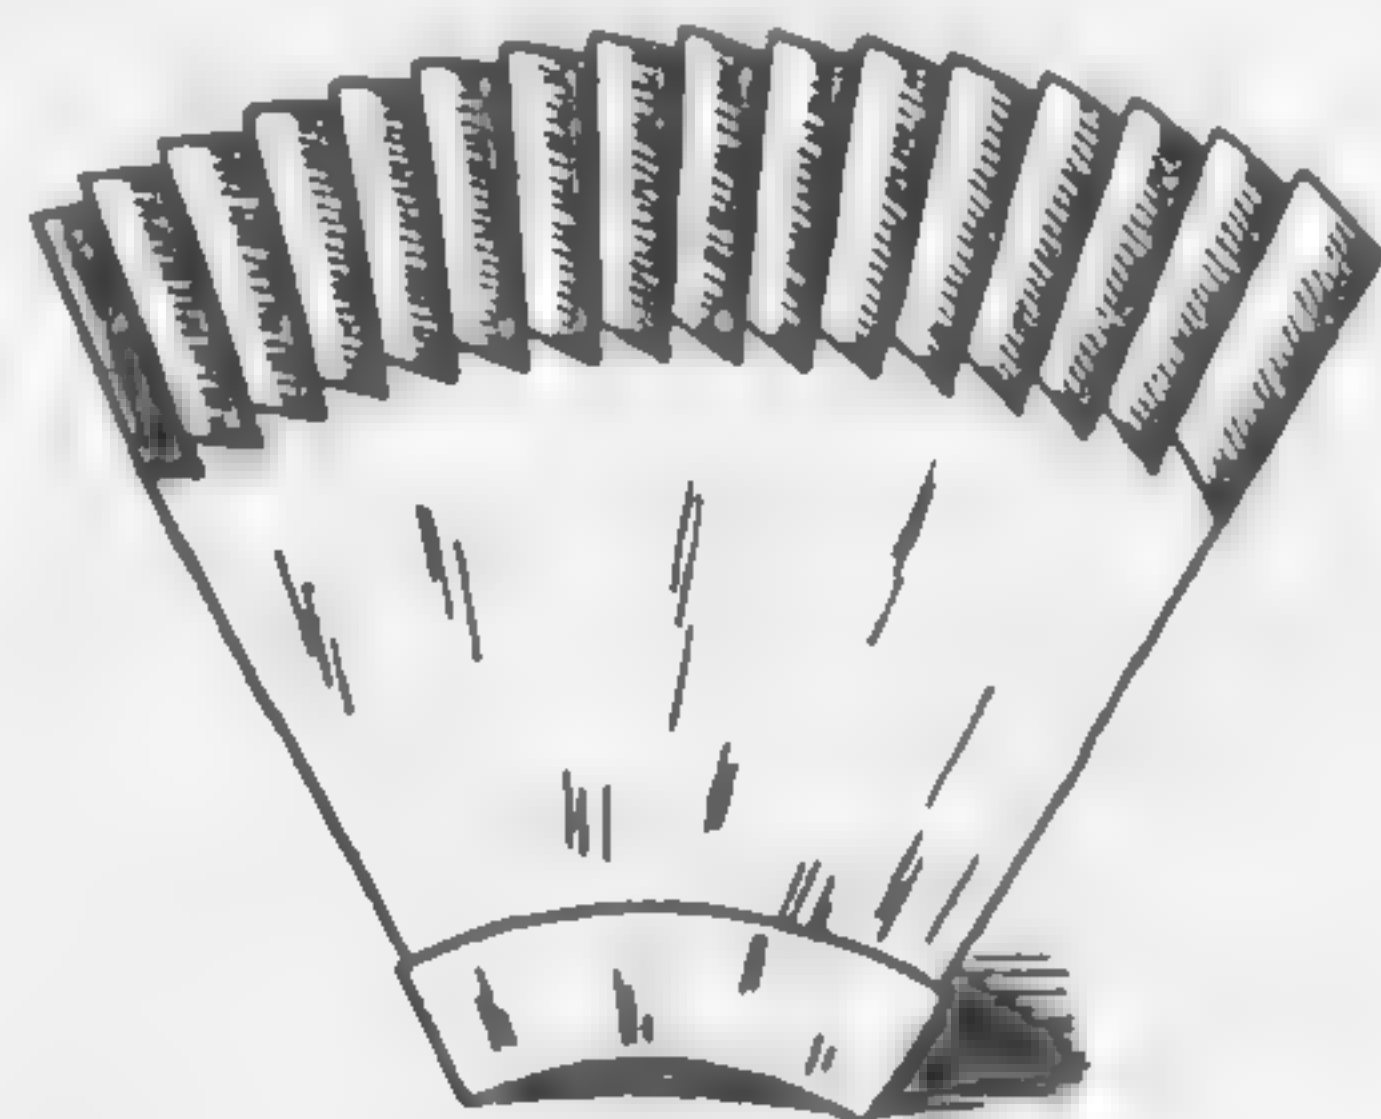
BODMER'S SECTIONAL GEAR CUTTER (*Inst. Mech. Eng.*)
